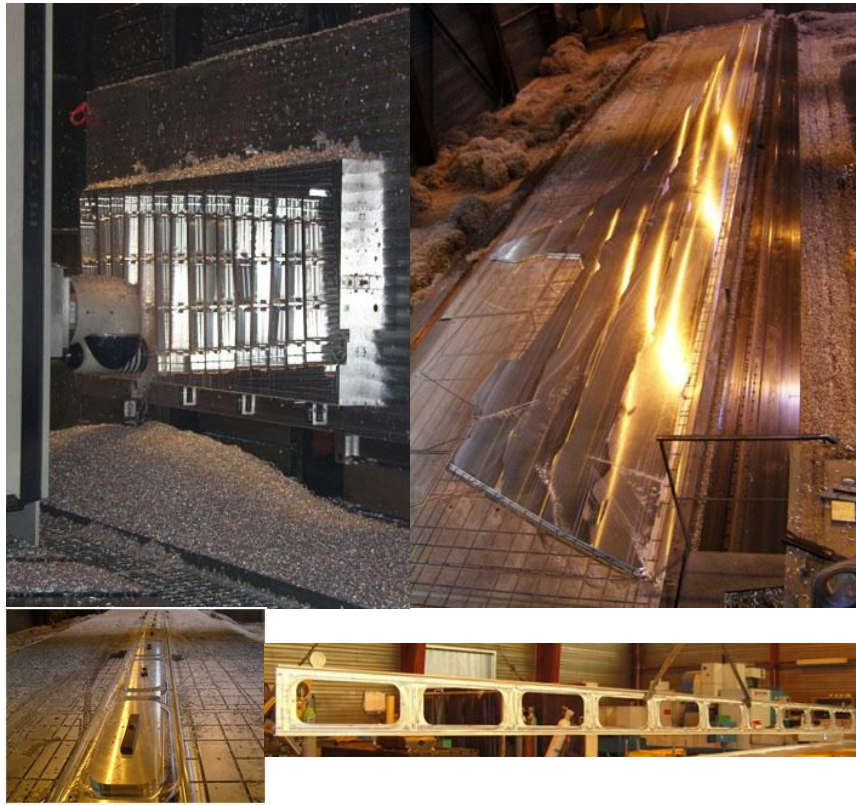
Machining examples of large aerospace monolithic parts made of aluminium alloy [6]
